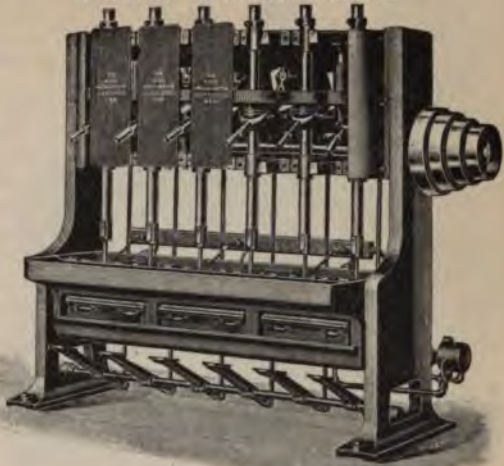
SHOWS SIX SPINDLE MACHINE.
